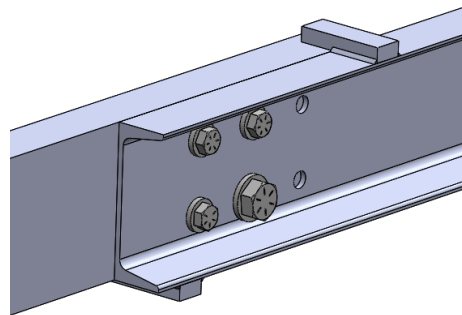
Connection between Center Piece and End Piece of the Boom
